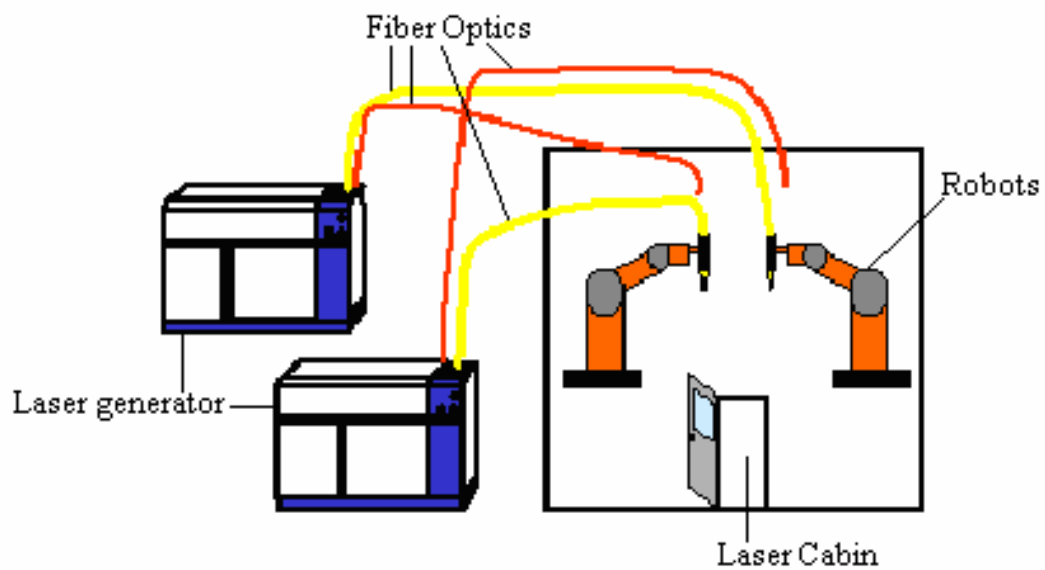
Sketch of the Laser welding installations seen in company “X”.
